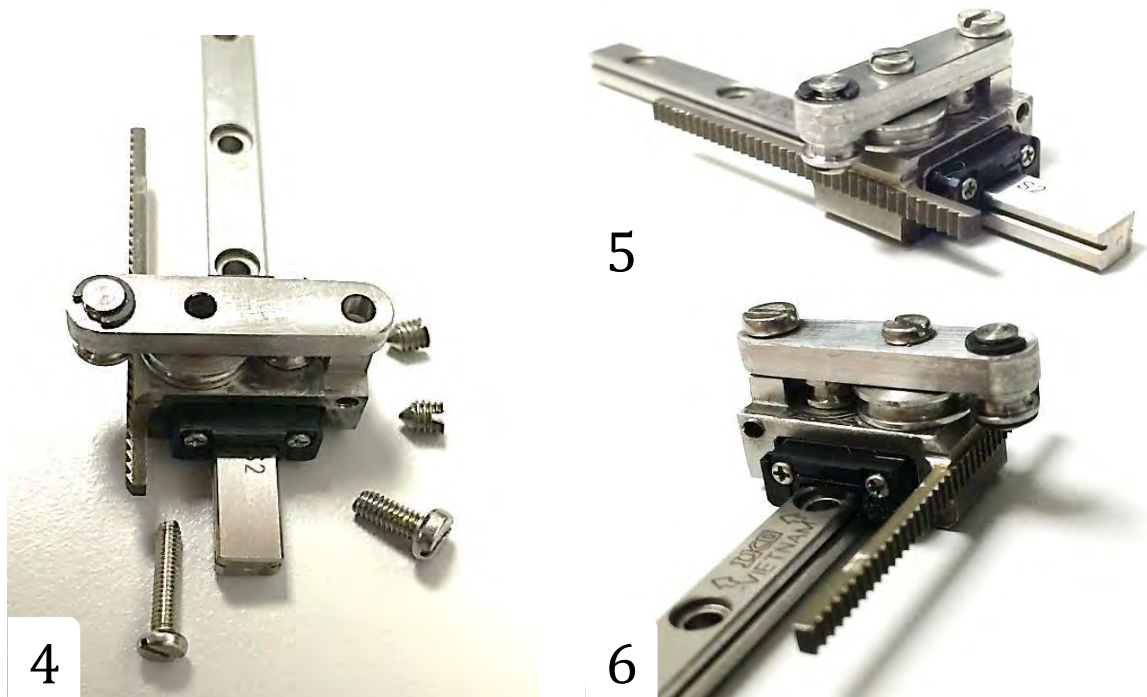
Assembly stages of the pulley-ratchet slider (Part 2)
